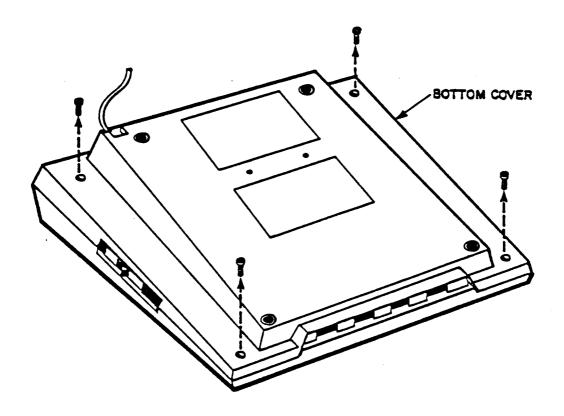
ATARI 400 Console, Bottom Cover Screw Location
